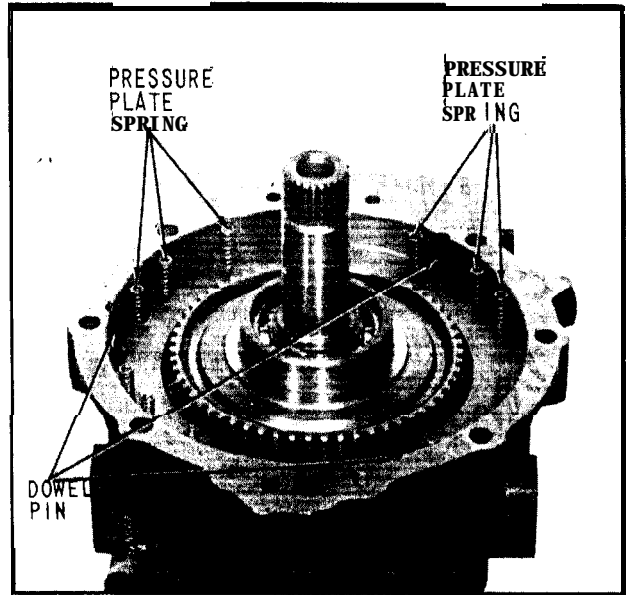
Installation of Twelve (12) Pressure Plate Springs and Three (3) Dowel Pins
